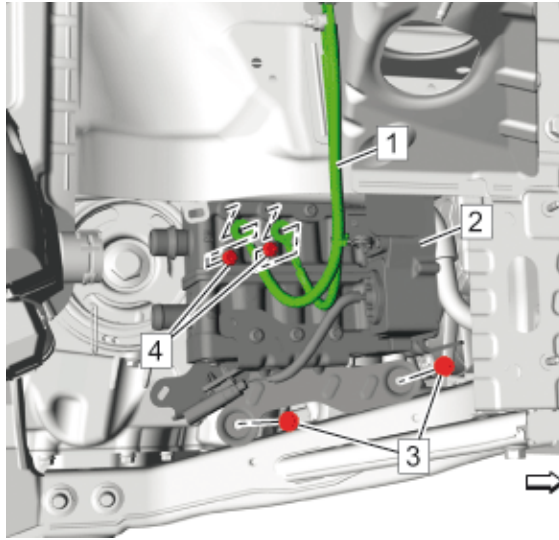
Heater Coolant Heater Bracket Assembly, Bolts And Wiring Harness
